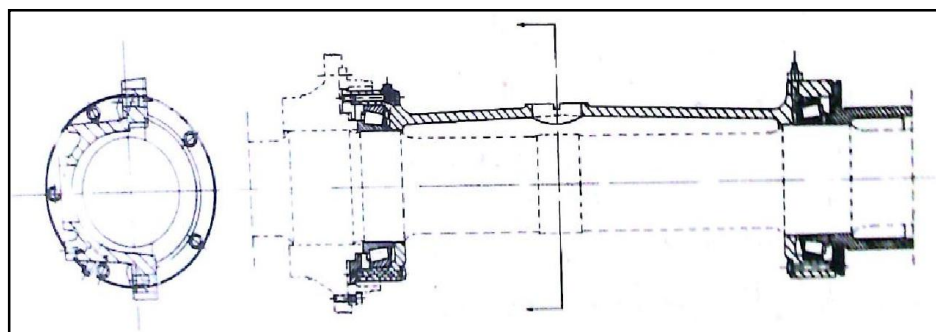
Suspension unit bearing arrangement ‘U’ type.
